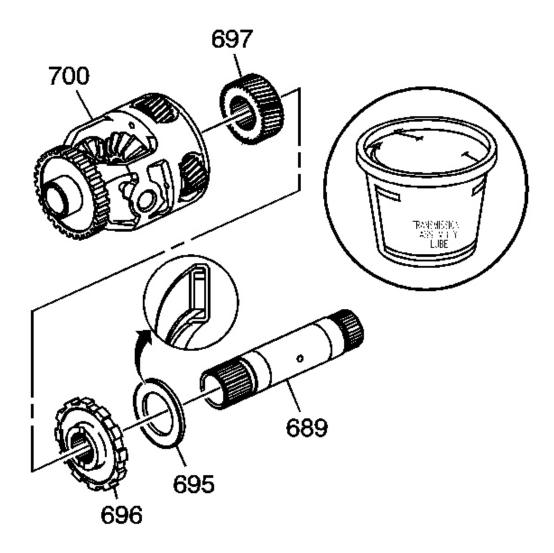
Assembling Differential Carrier Courtesy of GENERAL MOTORS CORP.
